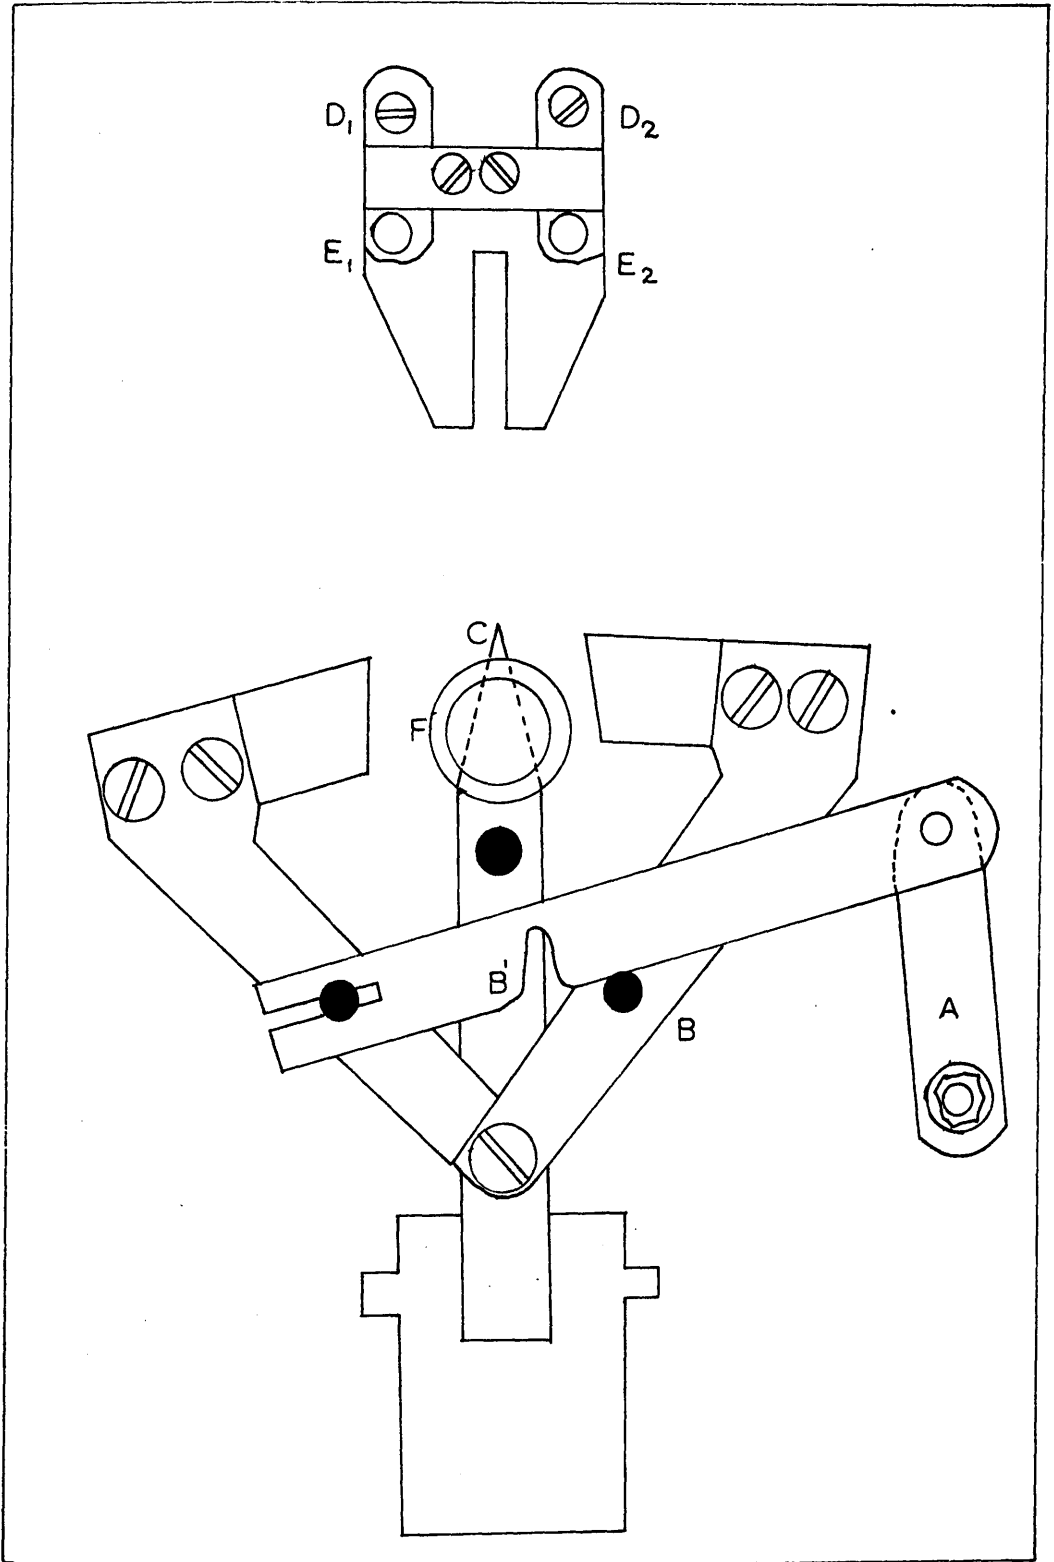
PLATFORM FOR TUFT ANCHORAGE TESTING - OPEN POSITION
